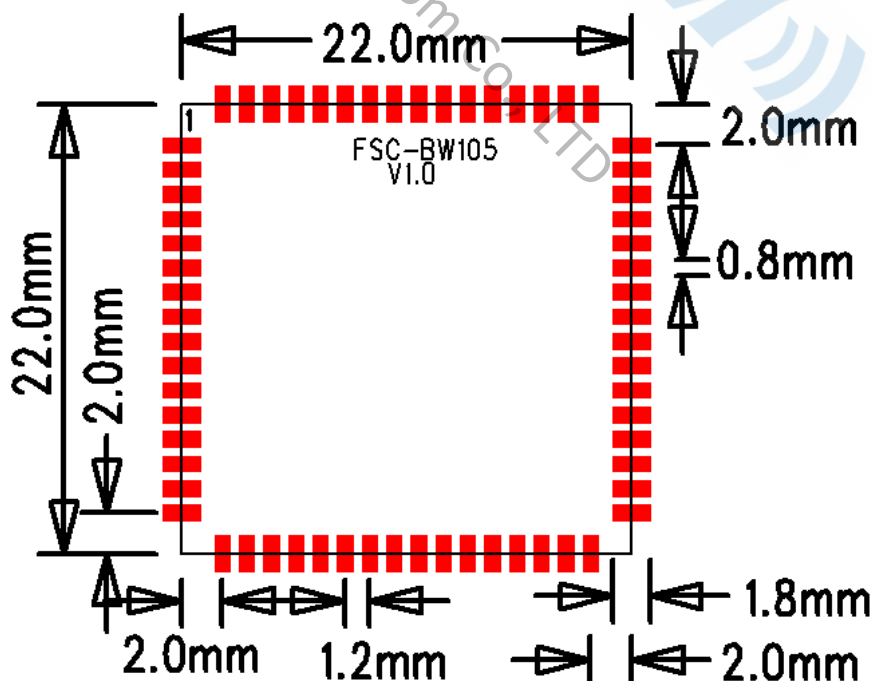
FSC-BW105 footprint Layout Guide (Top View)
